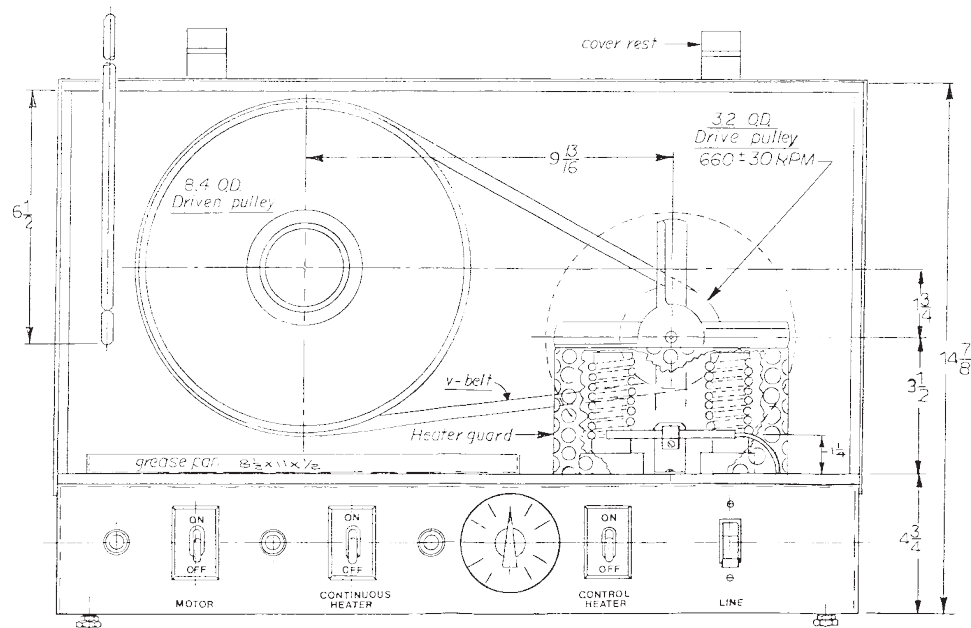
APPARATUS FOR TESTING LEAKAGE TENDENCIES OF WHEEL BEARING GREASES
